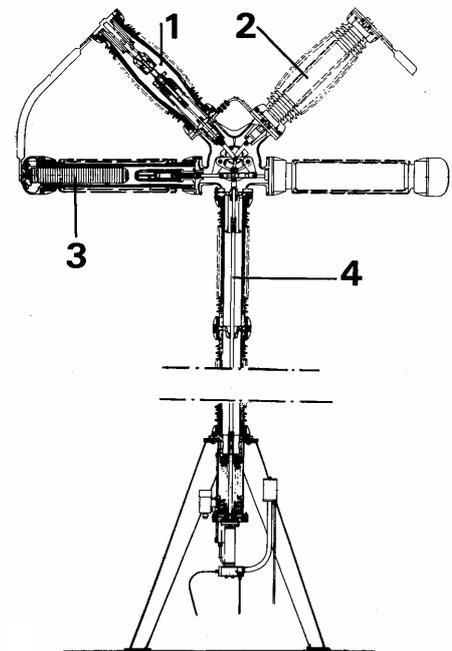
sectional view of a pole unit of 525 kV circuit-breaker equipped with closing resistors.
